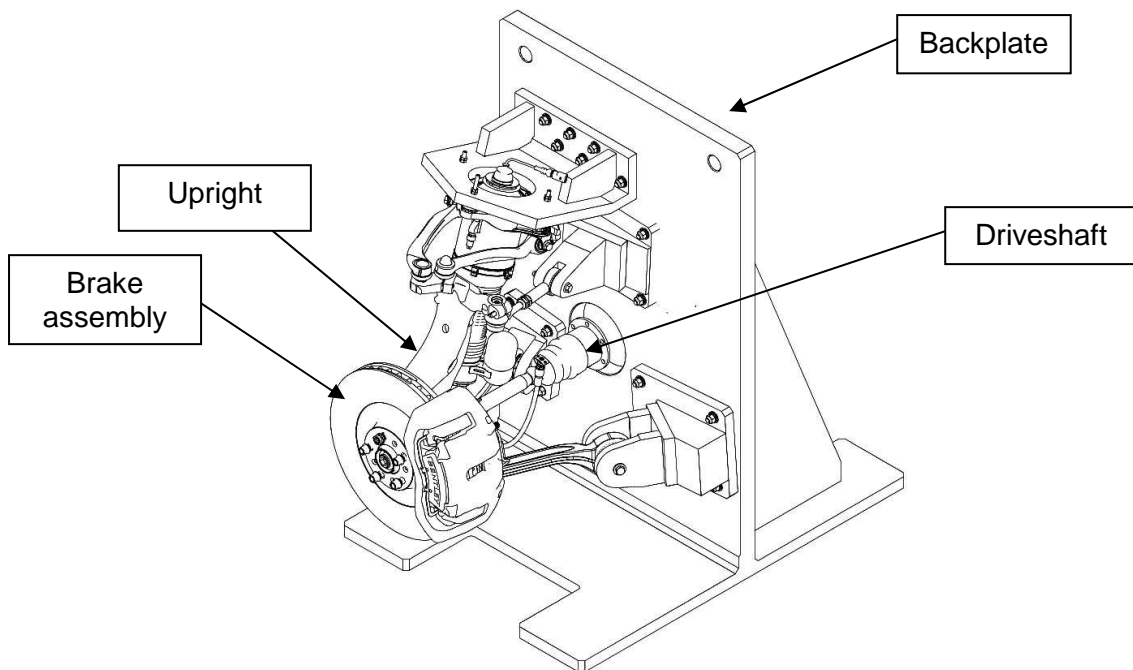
Detail view of rig assembly showing rigid suspension mounting points, brake assembly and suspension assembly.
